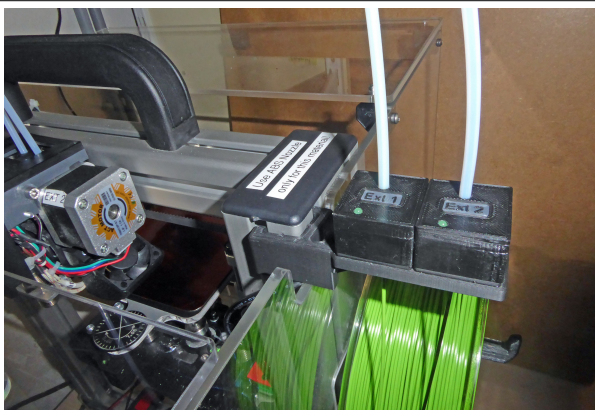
Two Clogging Sensors mounted at FELIC TEC 4 printer with dual extruders
